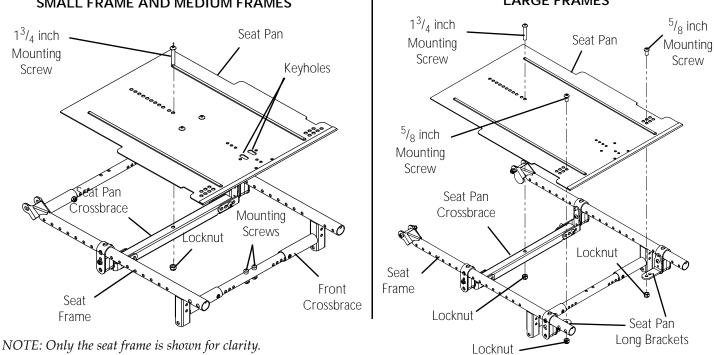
Remove the Seat Pan (Wheelchairs Built After 4/5/2010)
